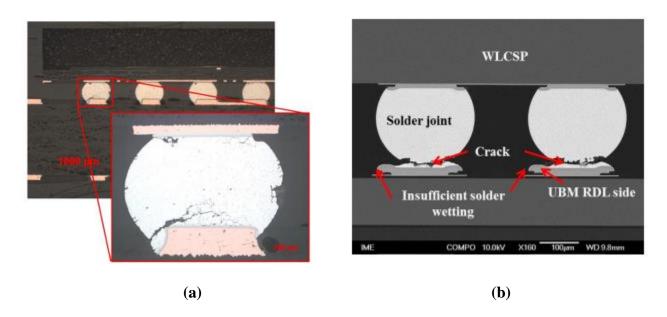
(a) Cross section of control BGA after 4400 thermal cycles at High Mean thermal profile [40]. (b) Failure mechanism of the package edge solder joints of top WLCSP with details of cracking on RDL side [41].
